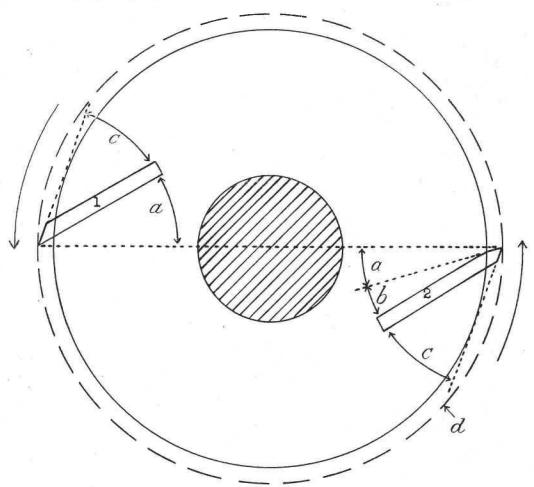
Terms used in connection with planer knives: a, Cutting angle; b, cutting bevel; c, clearance bevel; d, cutting circle; 1 and 2, planer knives.
